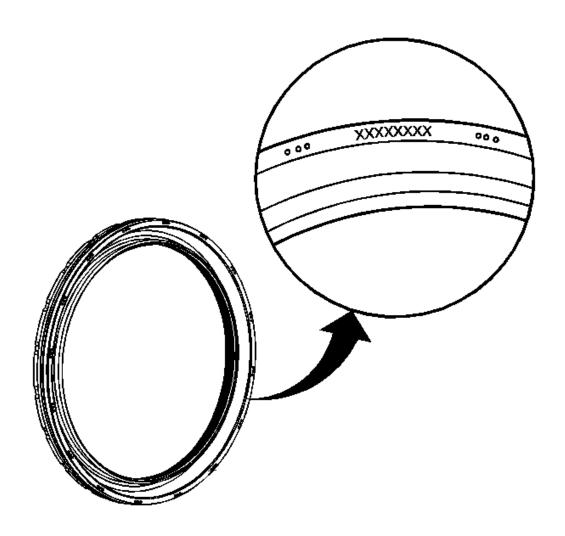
Identifying Oil Seal Courtesy of GENERAL MOTORS CORP.
